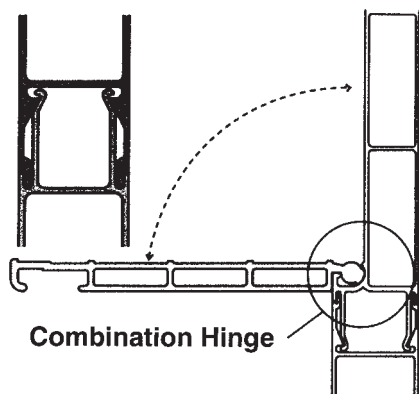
Example of fitting system on aluminum side board for commercial vehicle made of extruded profiles.
